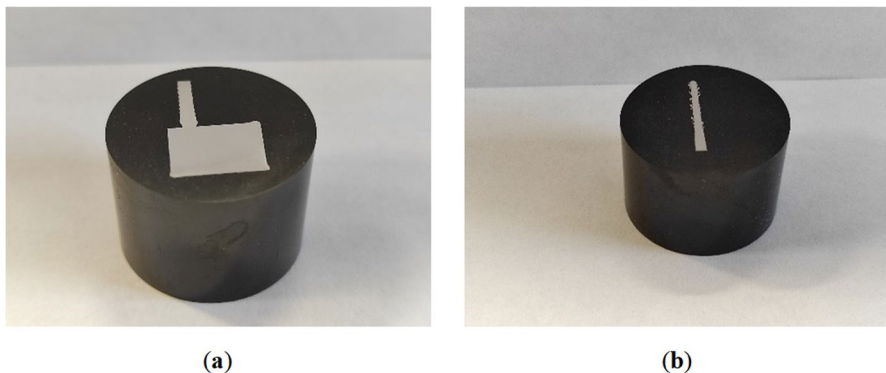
Sample profiling (a) bottom half of wall with substrate (b) top half of wall
